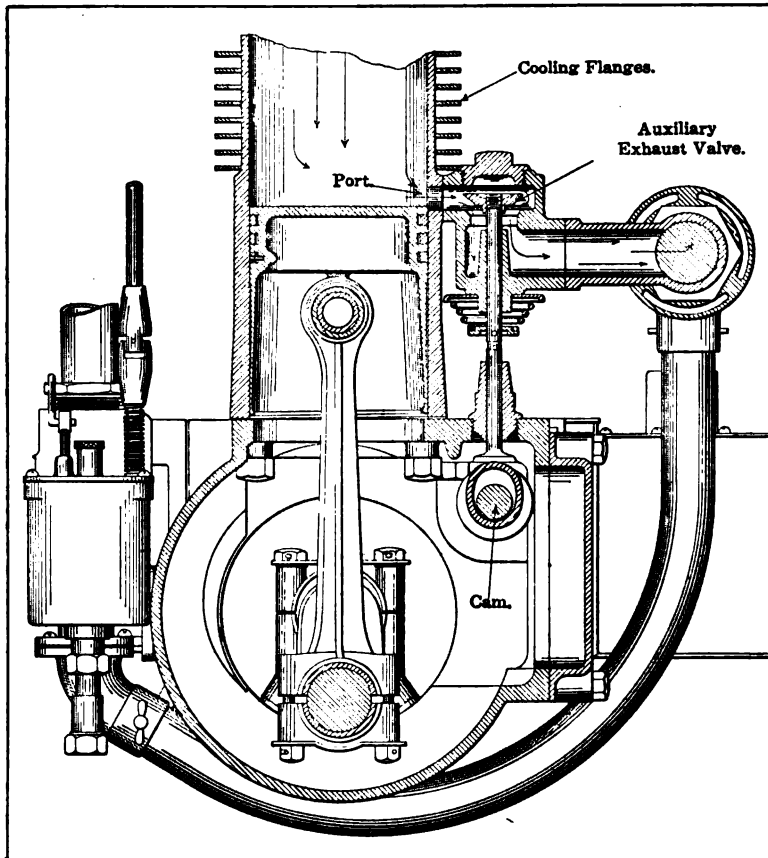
Depicting section through lower section of one type of Franklin engine, showing application of auxiliary exhaust valve to relieve cylinder of flaming gases at end of power stroke.
